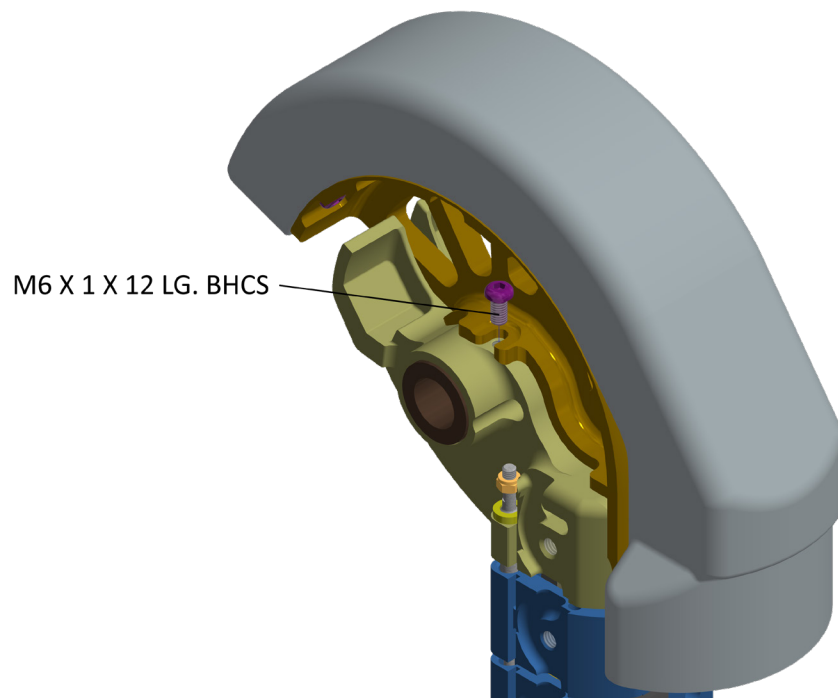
Attach Curved Impact Face to Mounting Bracket with M6X12 BHCS
